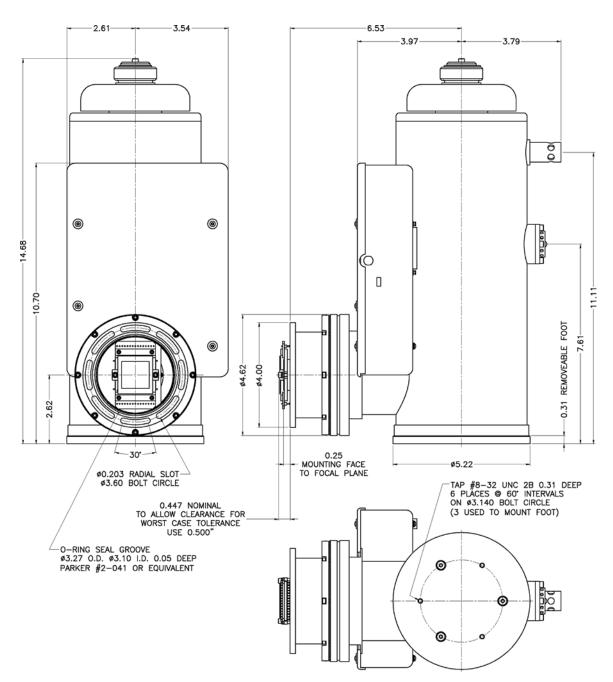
PI-SX LN-Cooled Camera (4.00" VON Flange)
